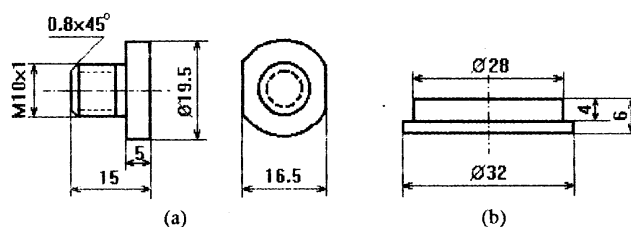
Geometry and dimensions of CE test specimens. (a) Vibratory CE. (b) Rotating disk CE
